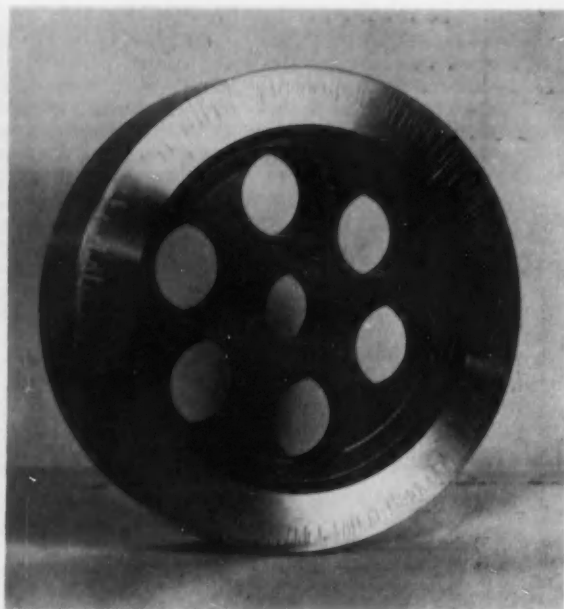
Surface cracks in plug gage, resulting from too severe grinding. Cracks made visible by wet magnetic particle method
